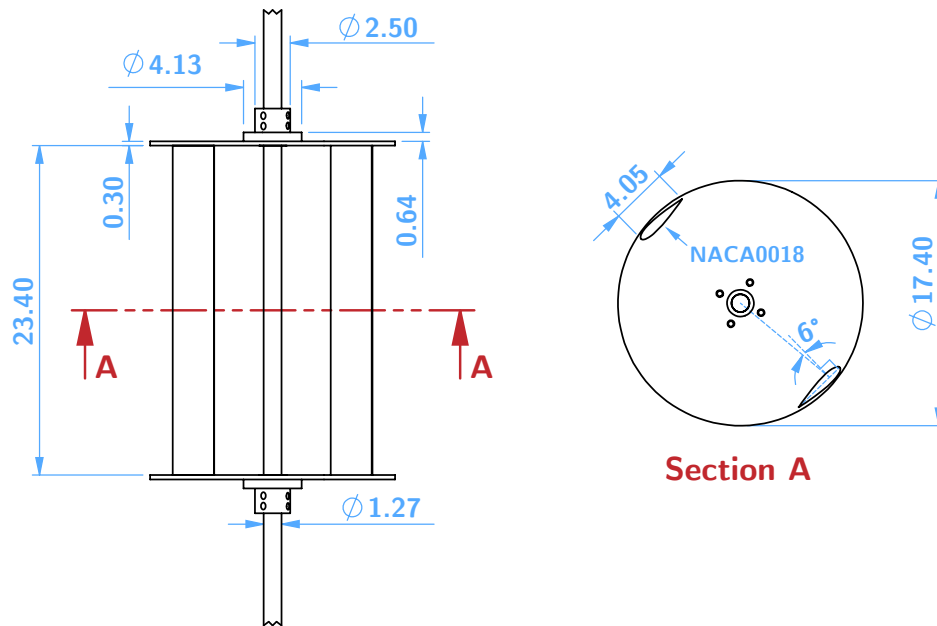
Dimensioned drawing of the standard experimental turbine. Dimension units are centimeters.
